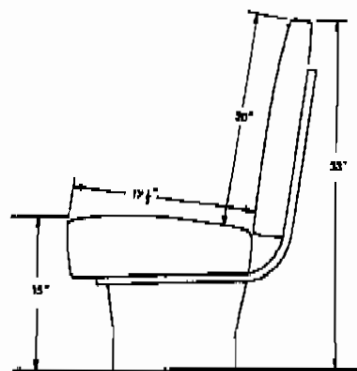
(k) - Pedestal mounted driver's seat, Superior Coach Corp. (Part #G 11588)
